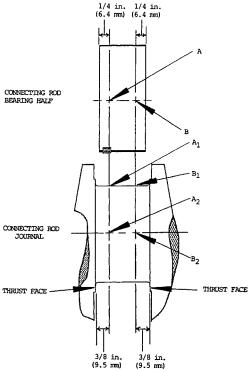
Clearance Measuring Points for Connecting Rod Bearings
